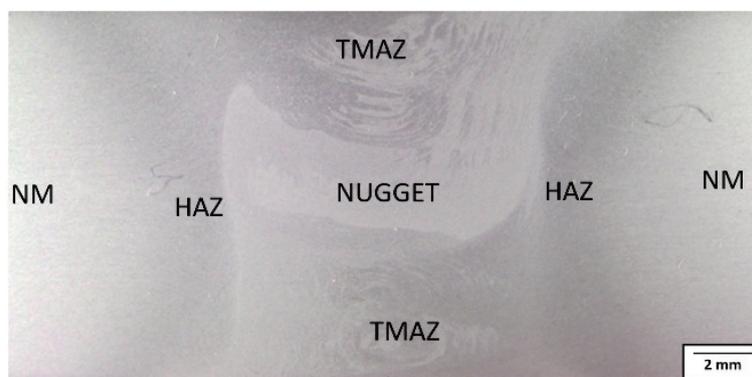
Macrostructure of FSW welded joint: NUGGET – weld nugget, HAZ – heat affected zone TMAZ – thermo-mechanically affected zone, NM – native material
